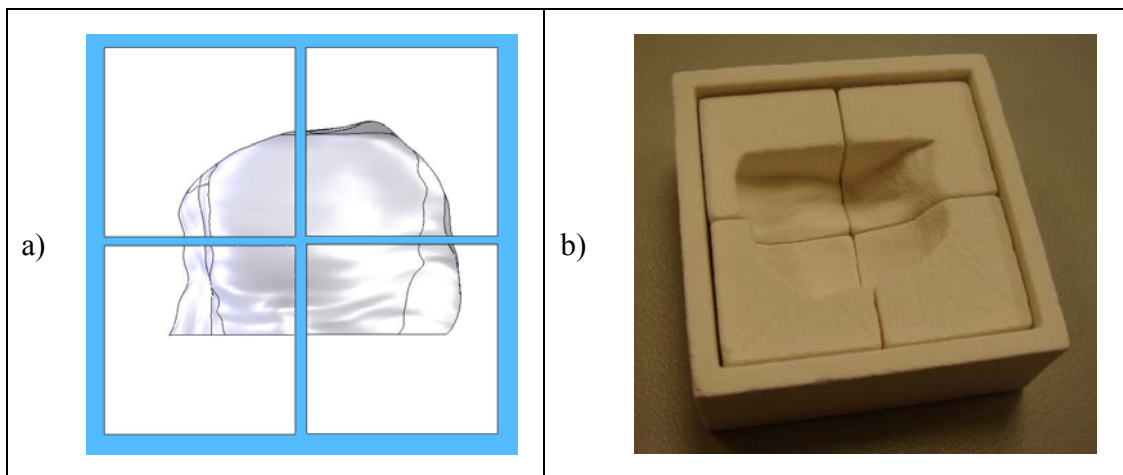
Multi-segment mold: a) CAD model and b) 3DP-fabricated.
